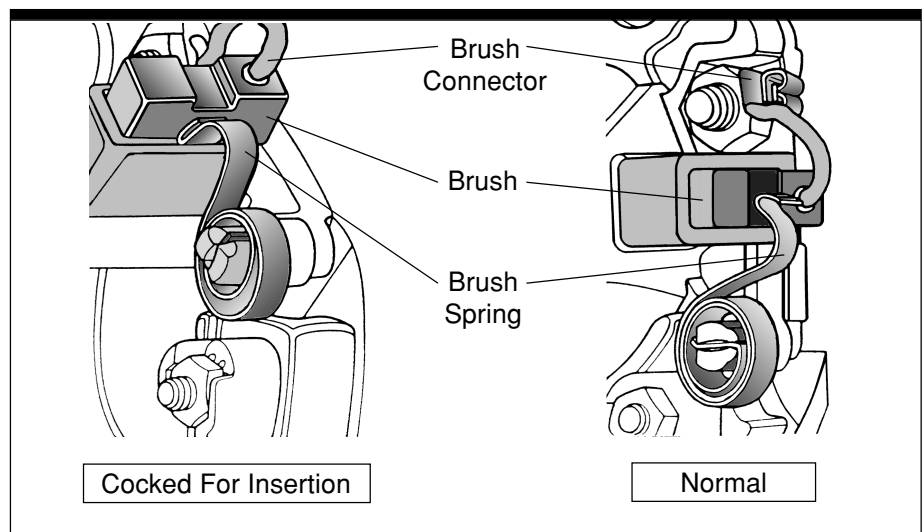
DC Motor Brushes (Gasketed Cover Removed)
